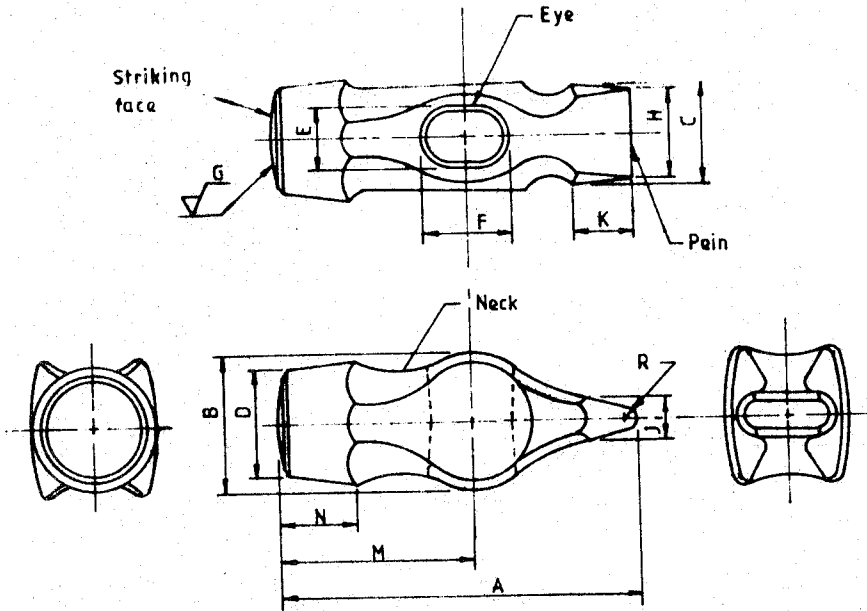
Dimensions of engineer's Ball Pein Hammers.
